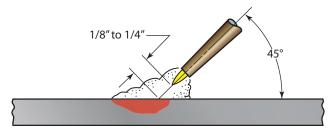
Hold the torch at a 45° angle in the direction of the weld.
